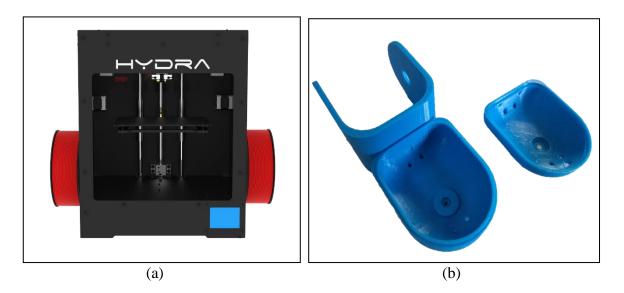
shows (a) Hydra Pro 200 3D Printer (b) Printed snake module
